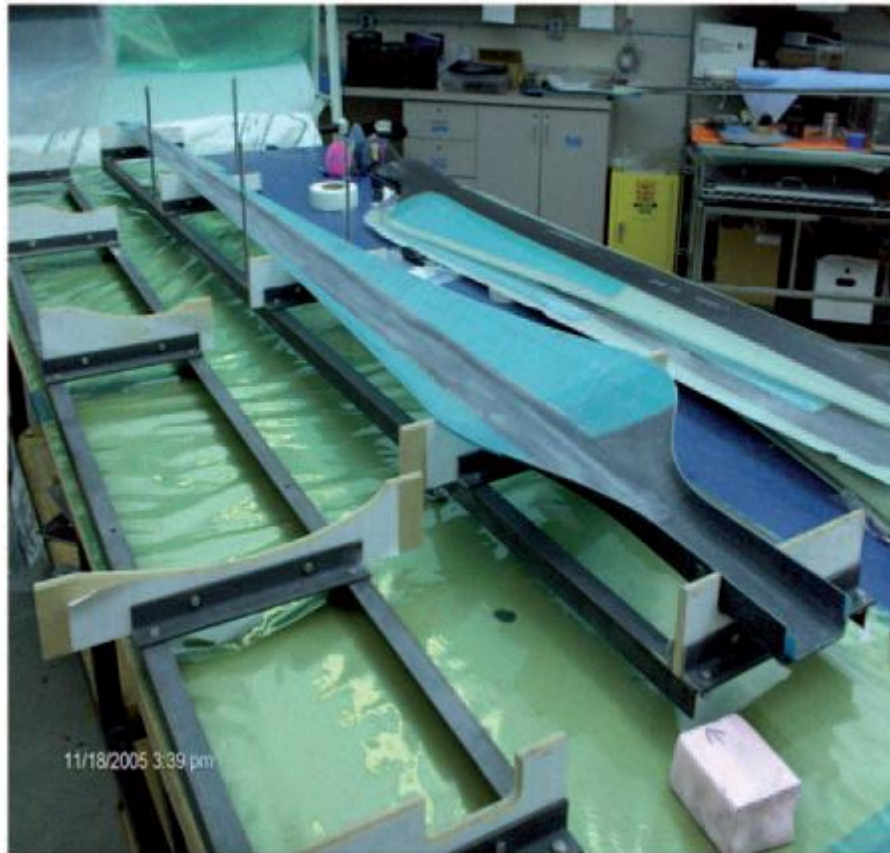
Blade fixture/jig in preparation of clamshell method (Sharma and Wetzel, 2010)
